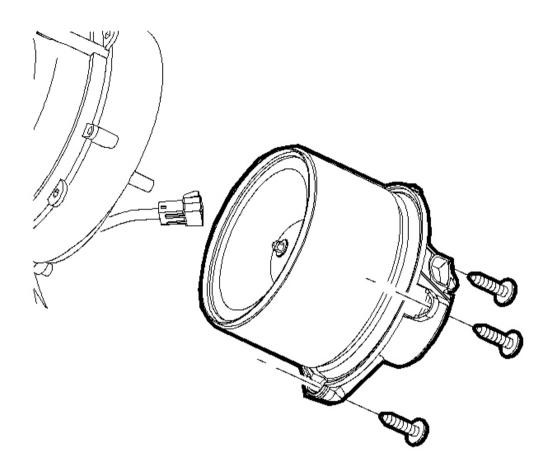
Electrical Connector & Blower Motor Courtesy of GENERAL MOTORS CORP.
